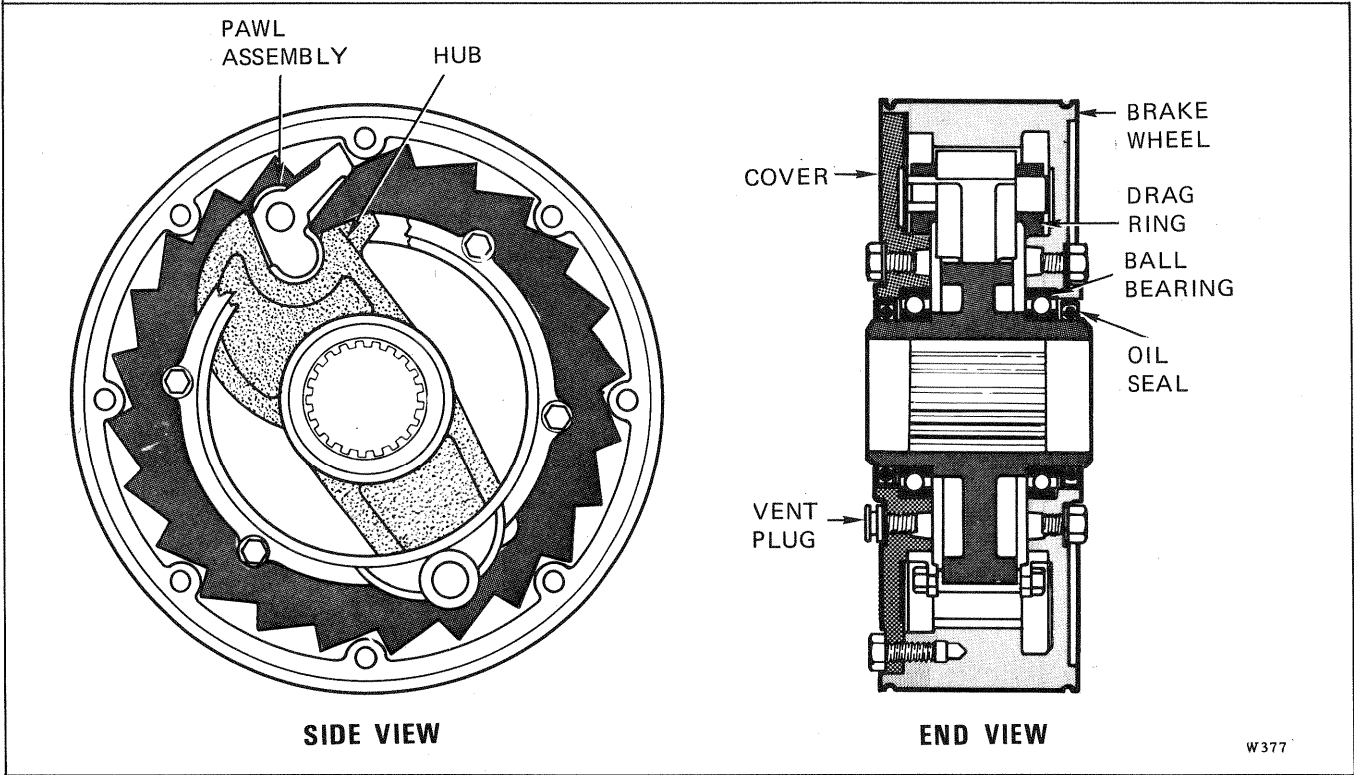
DIRECT DRIVE AUTOMATIC BRAKE ASSEMBLY (OPTIONAL)
